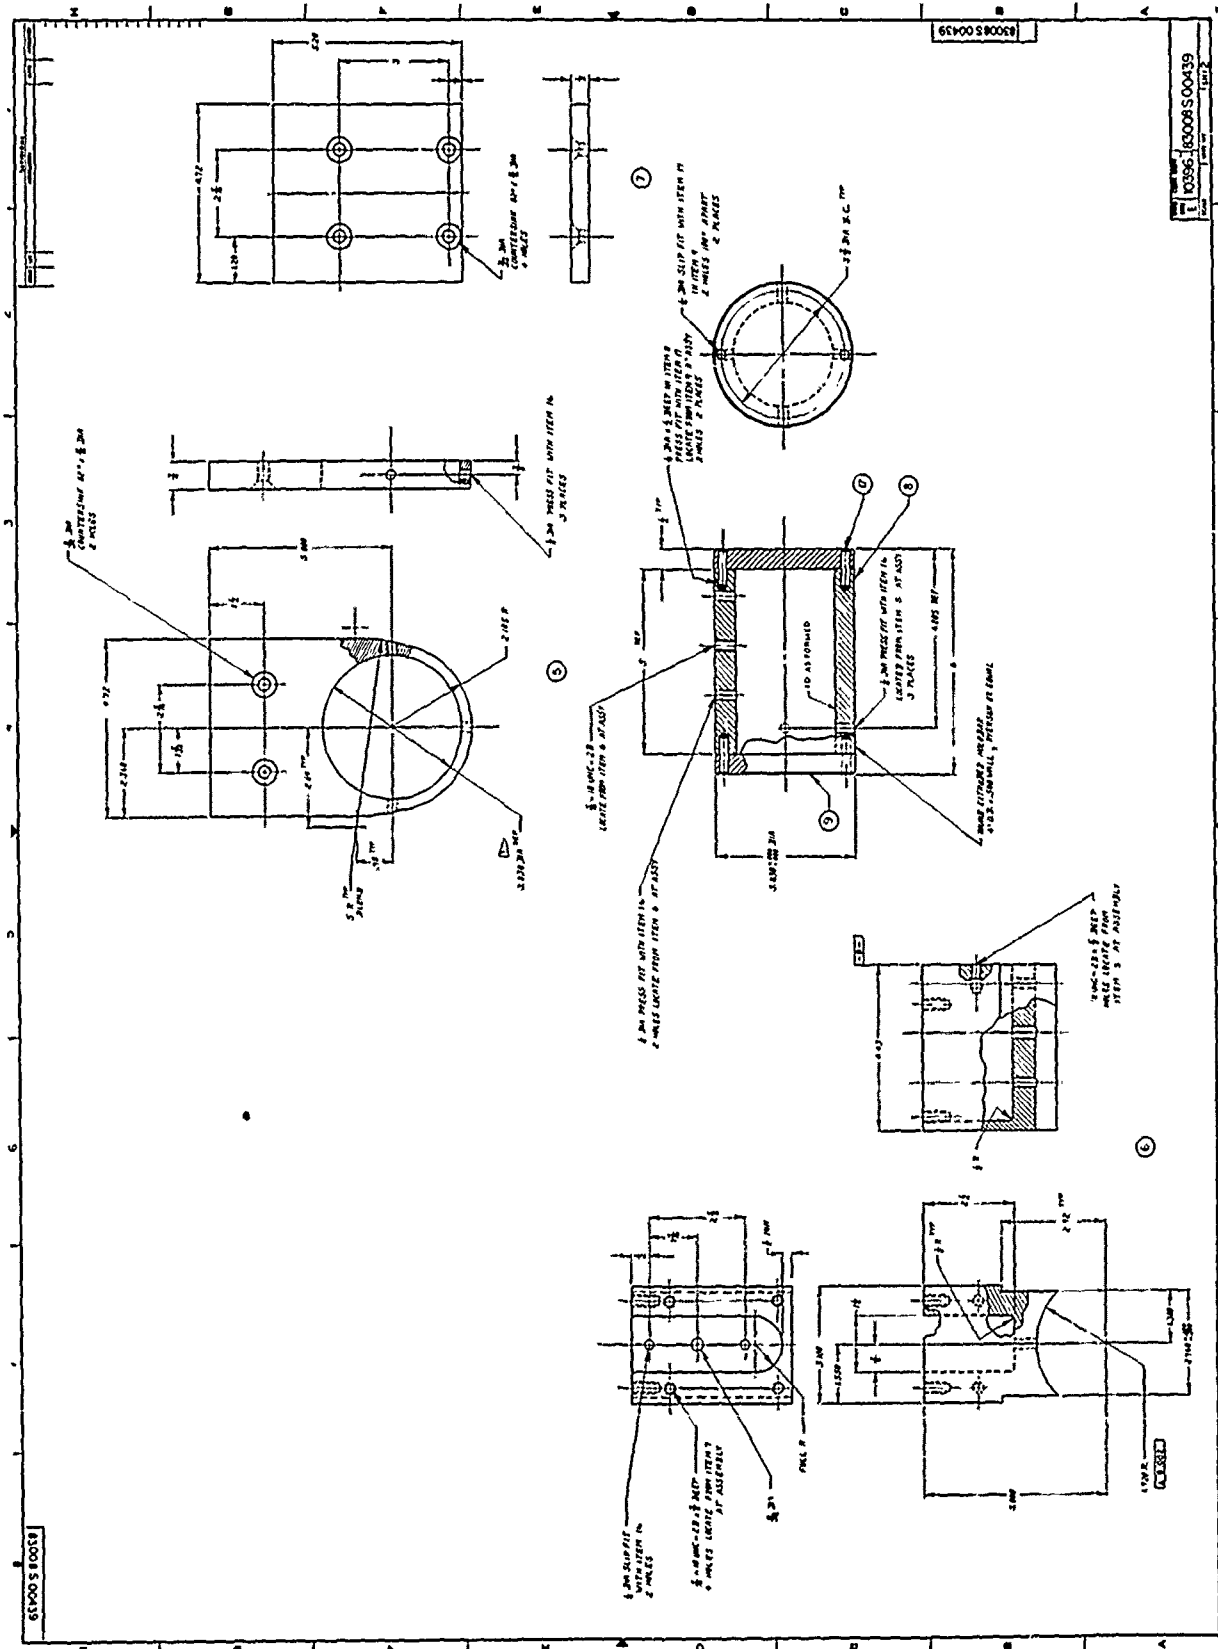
Layup Tool, Torque Arm Attachment, Drawing 83008S00439, Sheet 2 of 2
